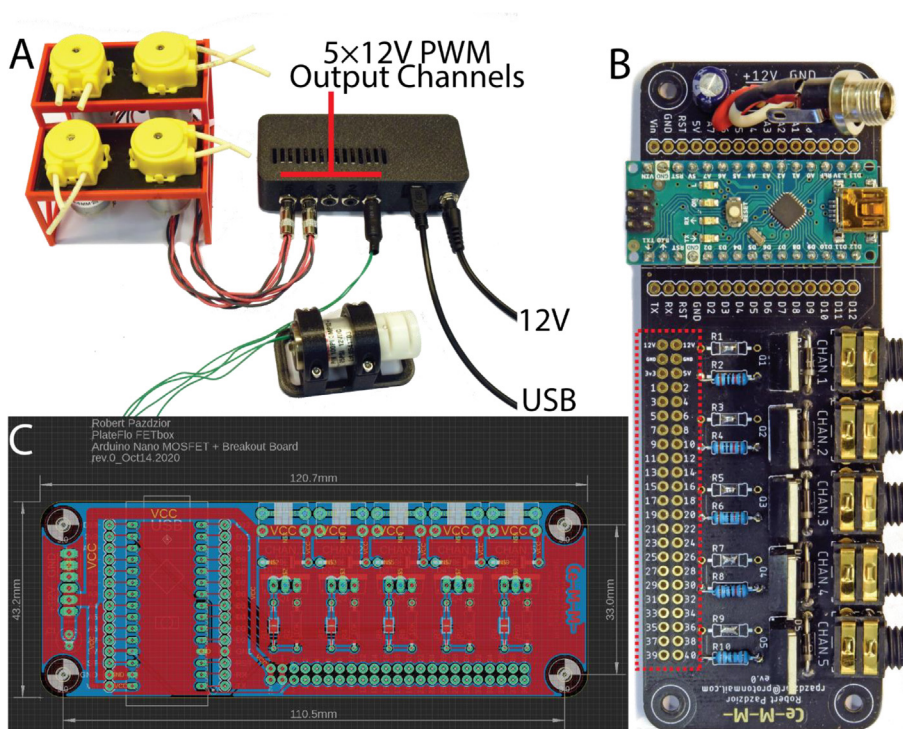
FETbox Hardware Controller. A) Example application of the FETbox, controlling a bank of inexpensive 12 V peristaltic pumps for four skimmer channels and a solenoid pinch valve. B) Assembled FETbox PCB. Dotted red box indicates unconnected solder pads for user customizability and expansion. C) FETbox board overview in EAGLE CAD software, red denotes top copper layer, blue the bottom copper layer as viewed through the top. (For interpretation of the references to colour in this figure legend, the reader is referred to the web version of this article.)
